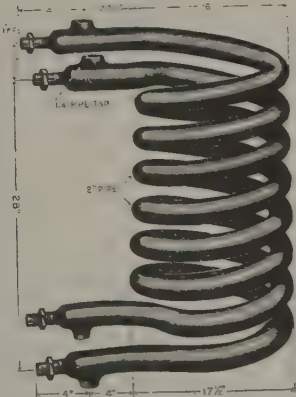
Gold Duplex Coil with Welded Ends; 2 in., No. 608A.
